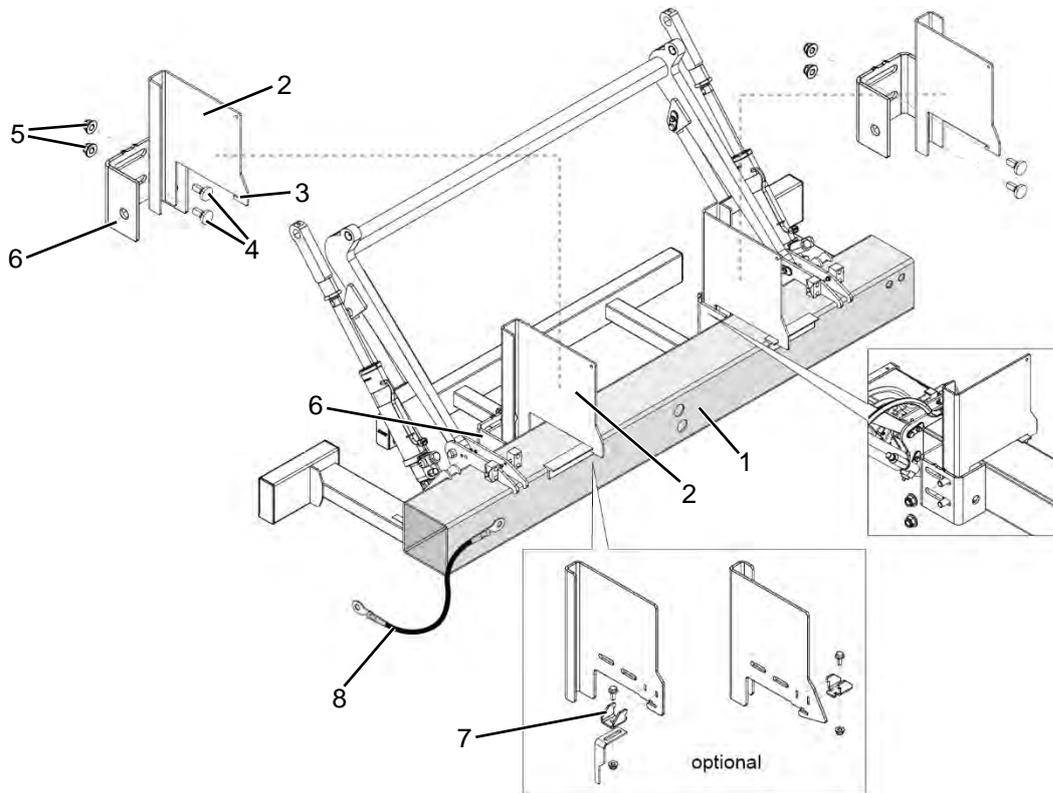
Pre-assembly with laterally adjustable bolted consoles
